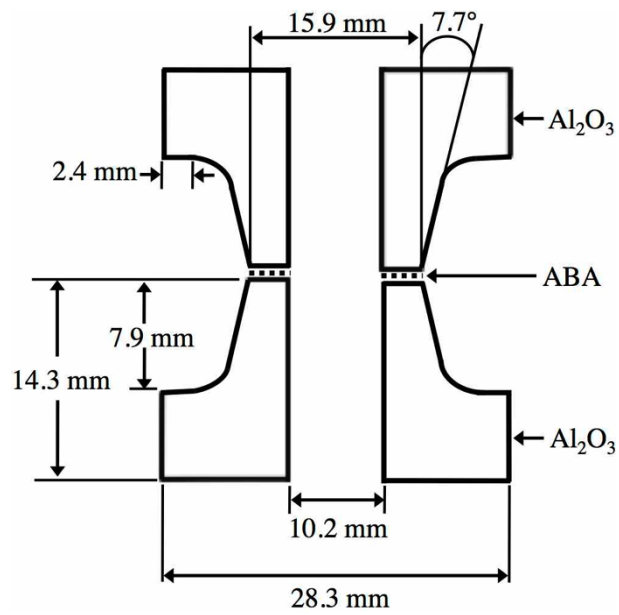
Schematic cross-section of the sandwich joining configuration used.
